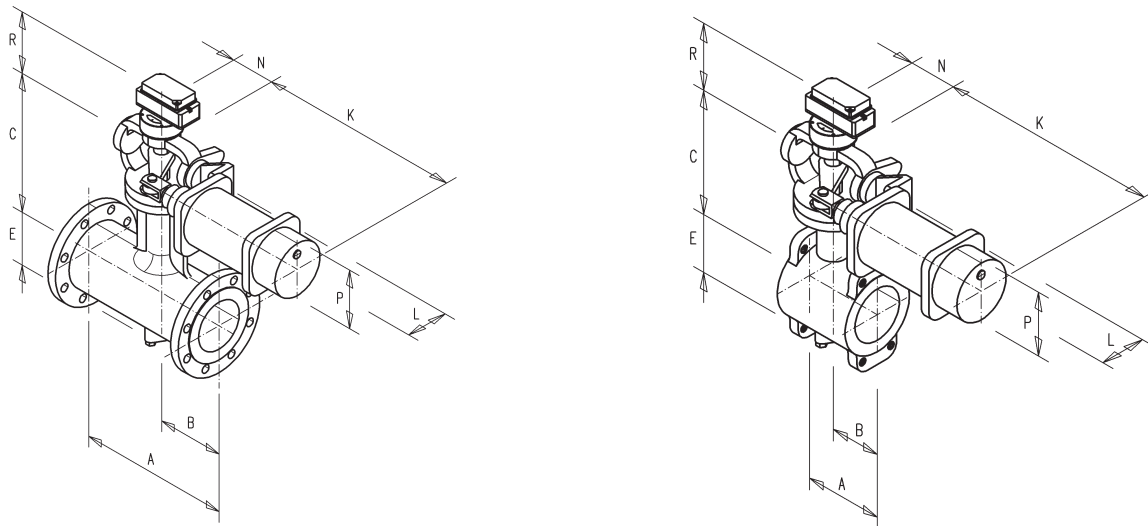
· Dimensional drawings for VETEC rotary plug valves: Type 72.3 R (flanged design) and Type 72.4 R (wafer-style design)
